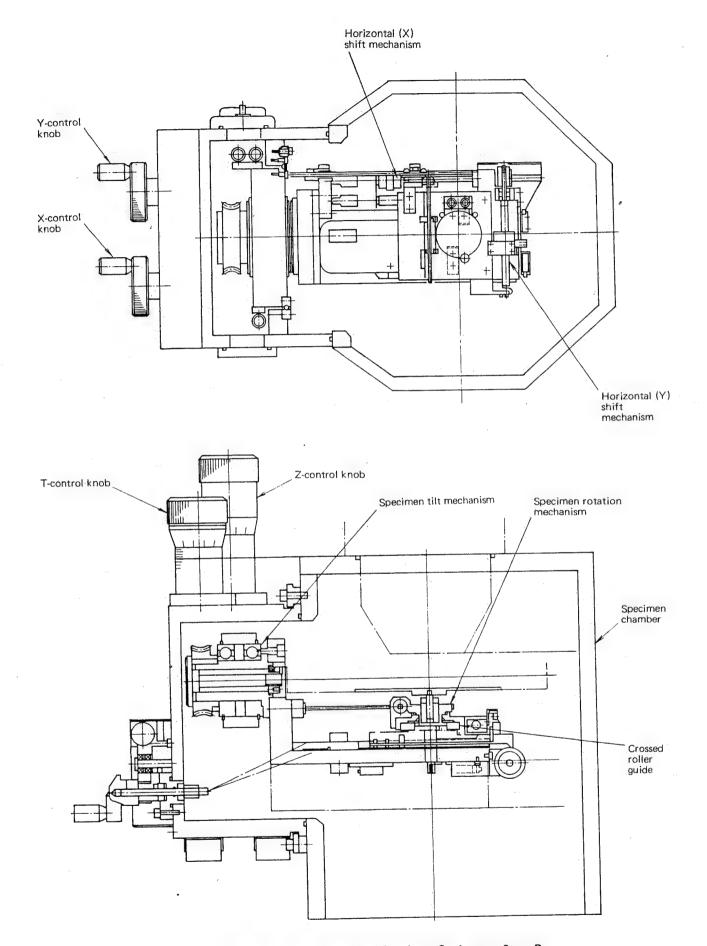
Sectional View of Large-Sized Specimen Goniometer Stage A
